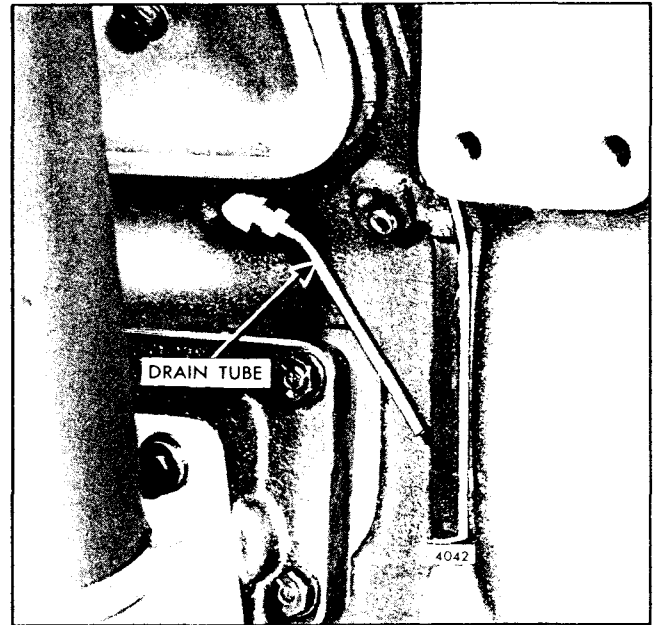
Air Box Drain Tube Mounting (6V Engine)
